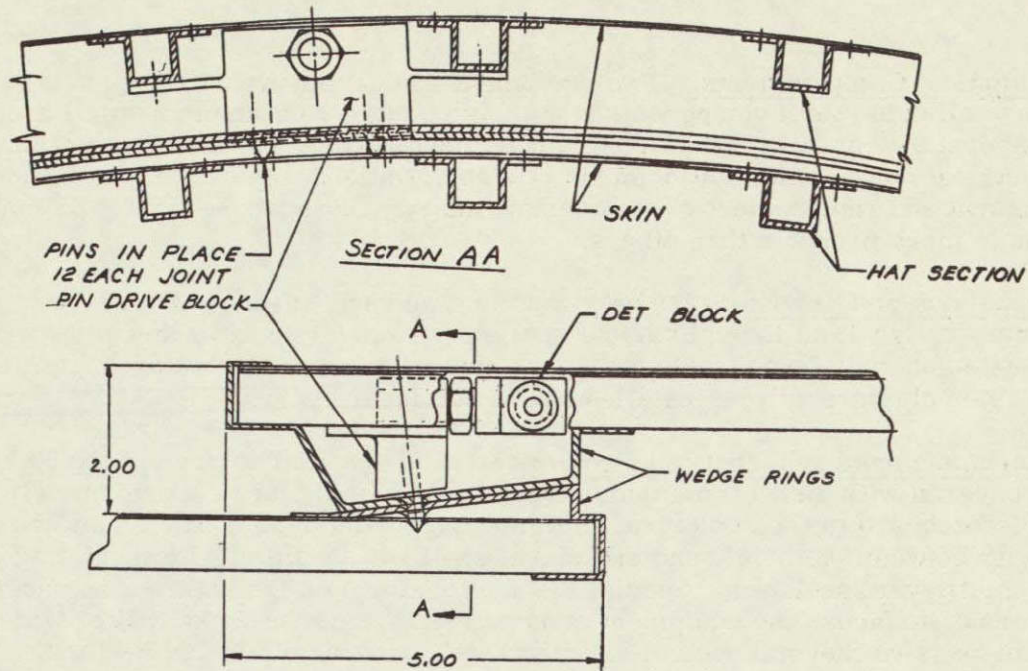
Detail of Wedge Rings and Extend-Lock Pins
